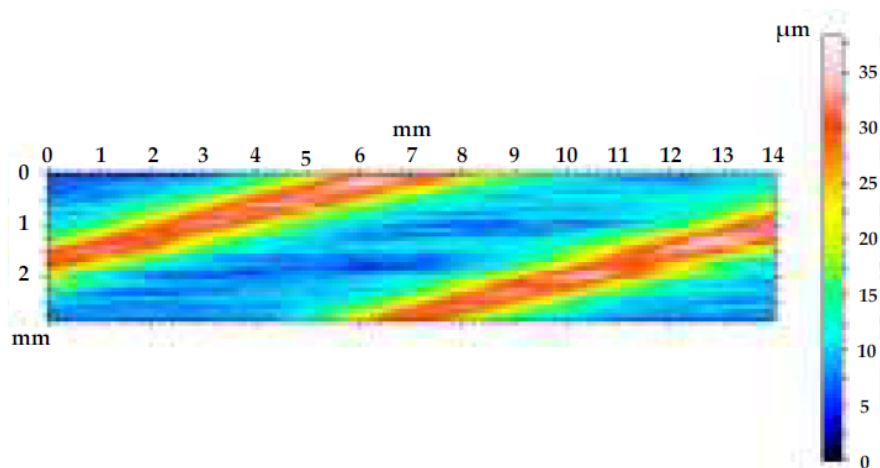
An example of a workpiece texture produced using a circumferentially grooved wheel, adapted from [55].
